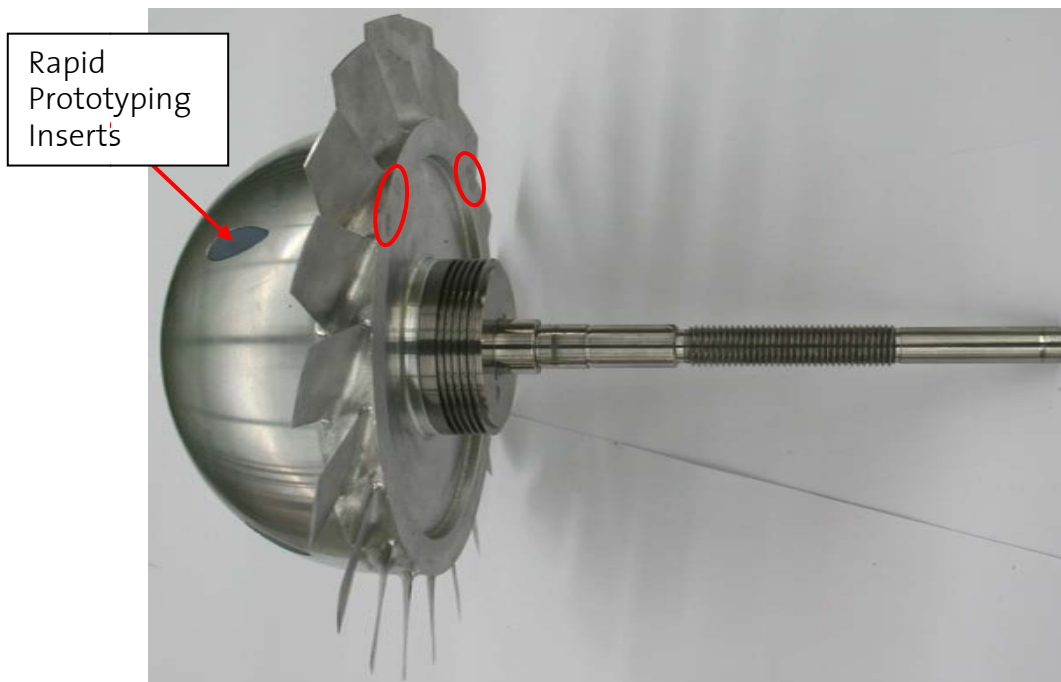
Rotor grinded for Dynamic Balancing at Location of Balancing Plane 1.
